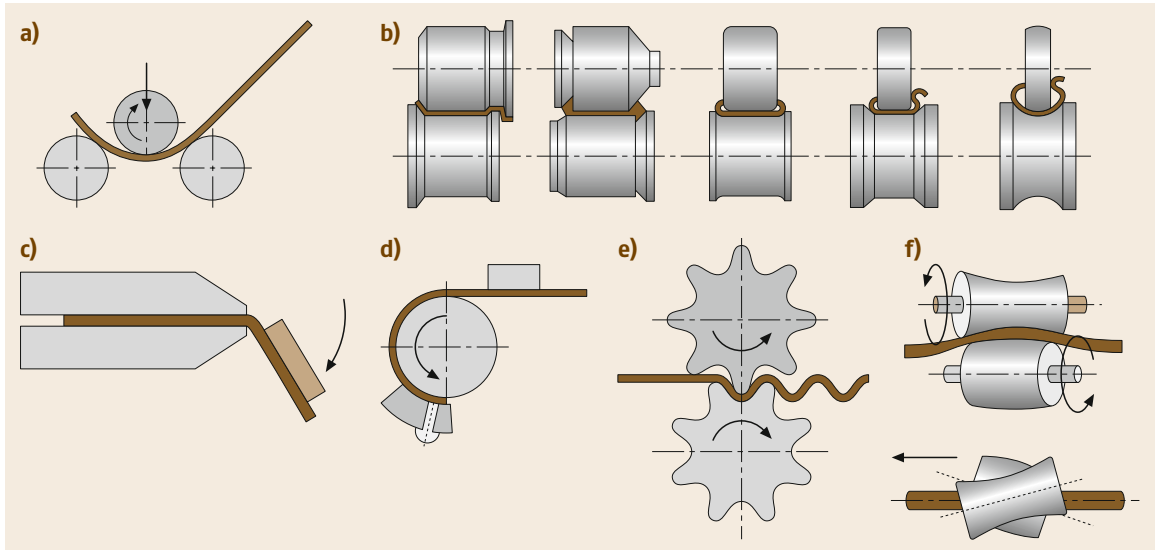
f Bending with rotary tool motion: (a) roll bending (round bending with rolls), (b) roll forming, (c) folding, (d) wiper bending, (e) corrugating, and (f) roller straightening
